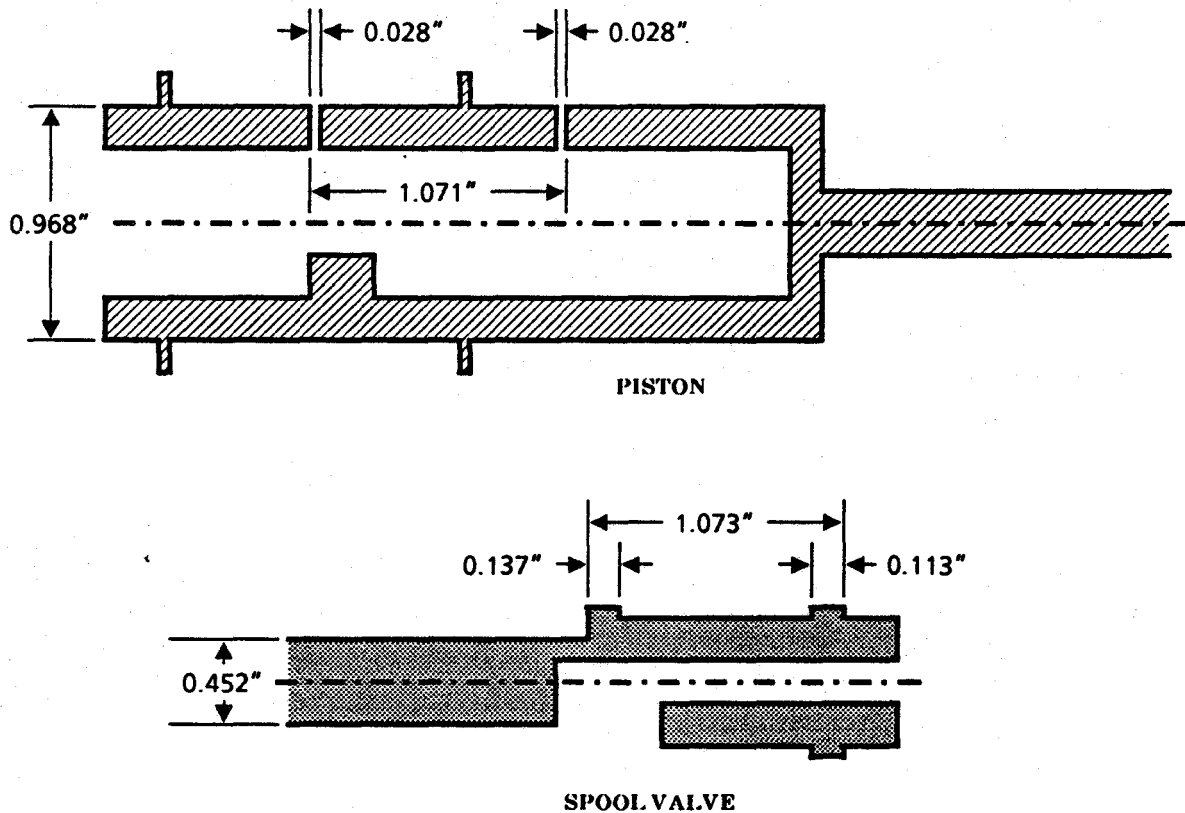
SELECTED DIMENSIONS OF THE PISTON AND SPOOL VALVE
